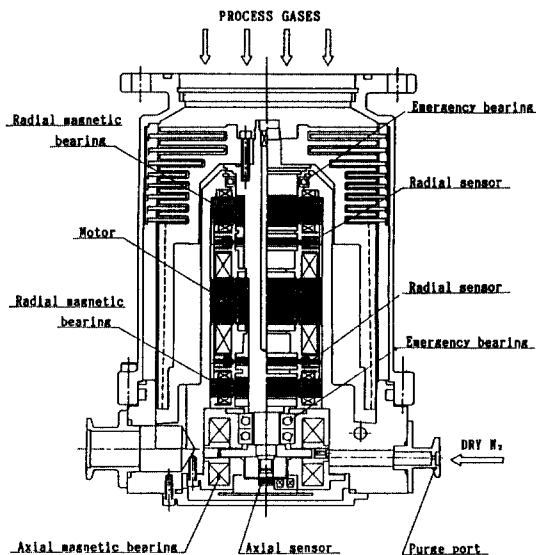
Sectional drawing of TMP. (5 axes controlled/turbine and screw compound rotor: STP-H600C)
